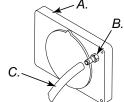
Removing air and fuel line hoses, (100.000 Btu/Hr).
